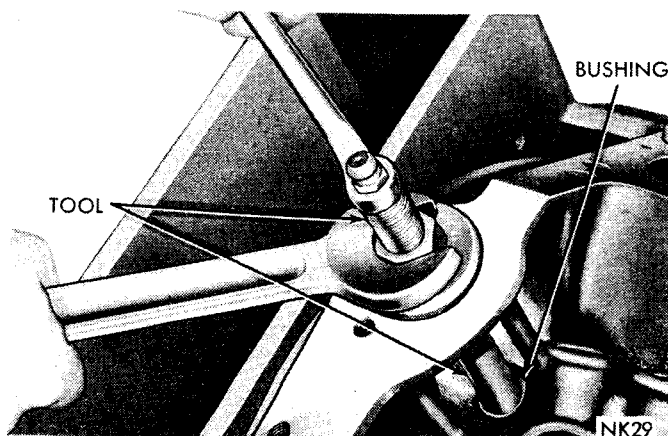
Burnishing Distributor Drive Shaft Bushing
